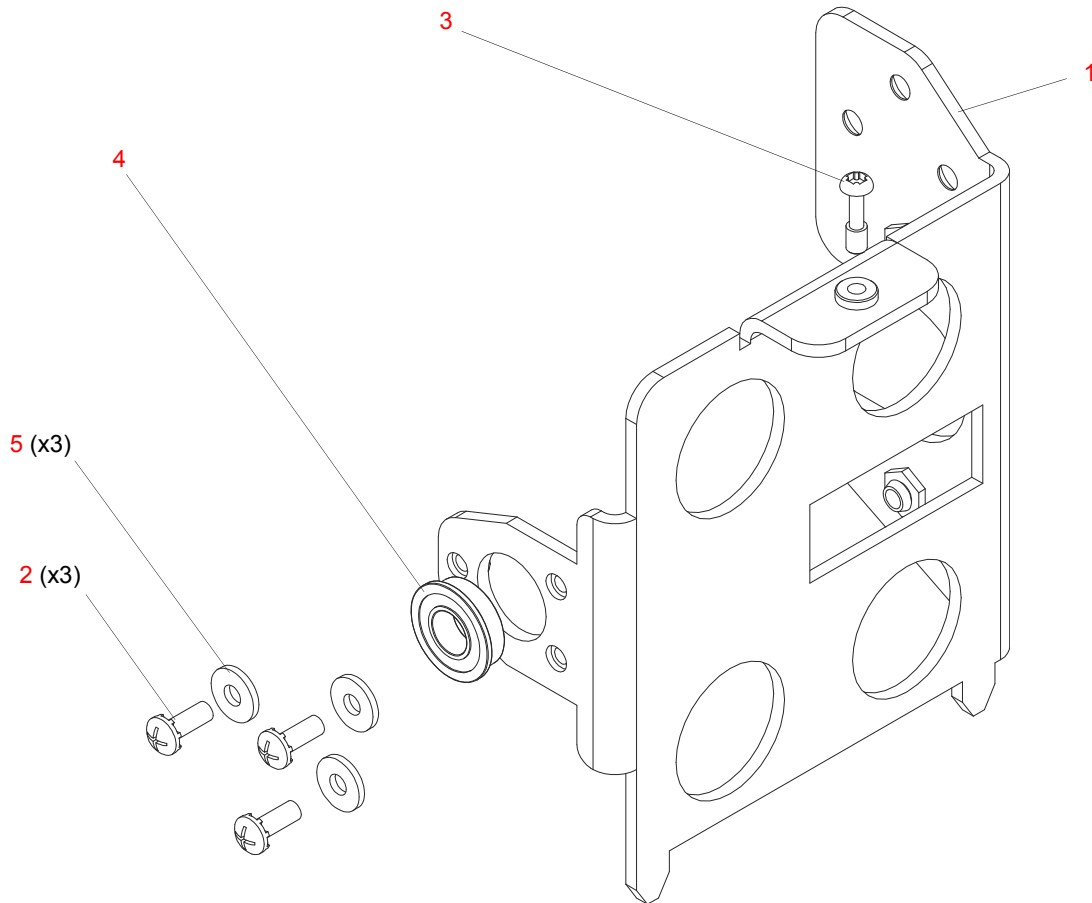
Gobo Bulkhead Right Bracket Assembly
